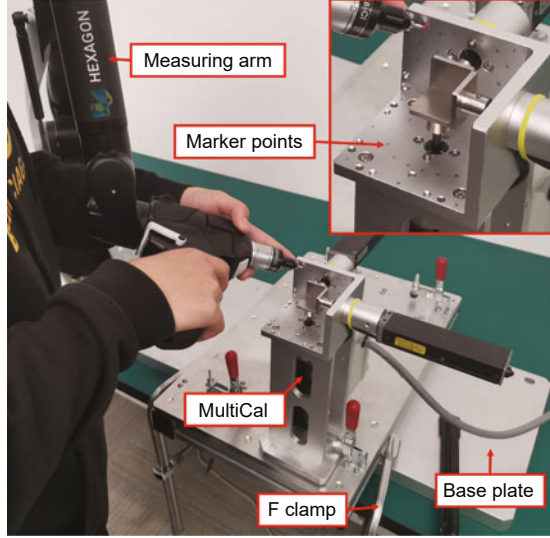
Characterizing the multi-position fixture with a Hexagon measuring arm
